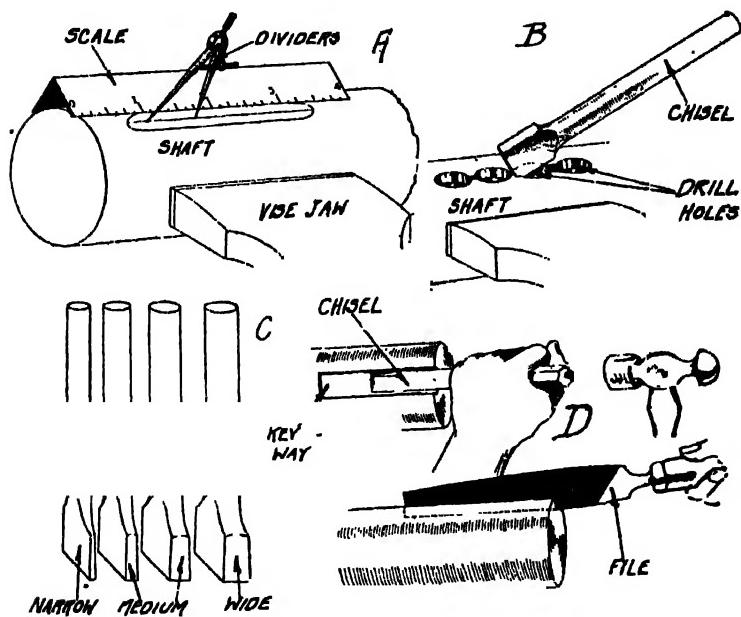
Methods of Cutting Keyways in Shafts without Machine Tools.
